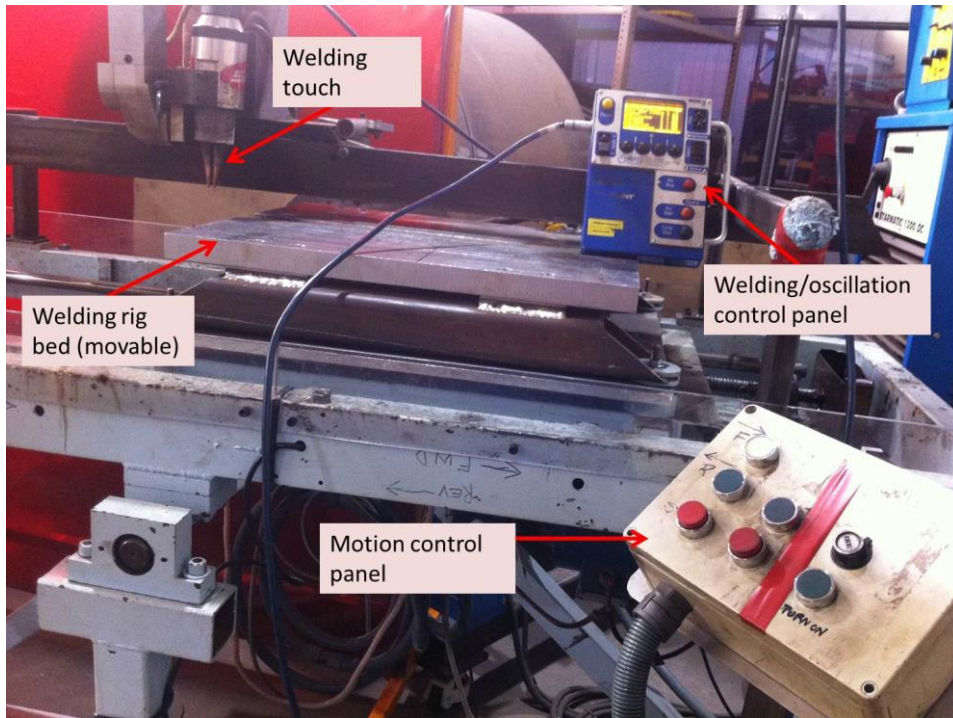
Welding rig with an RMS welding head oscillator
